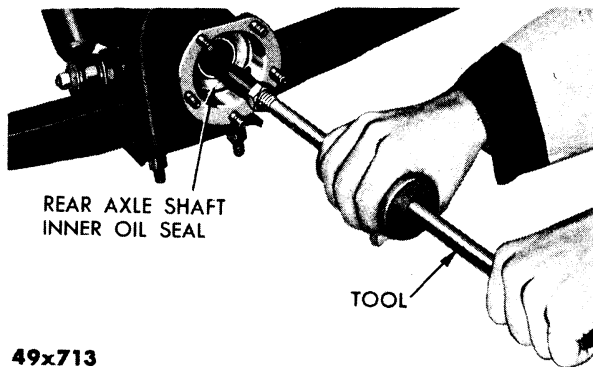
Removing Inner Oil Seal Using Tool C-637
